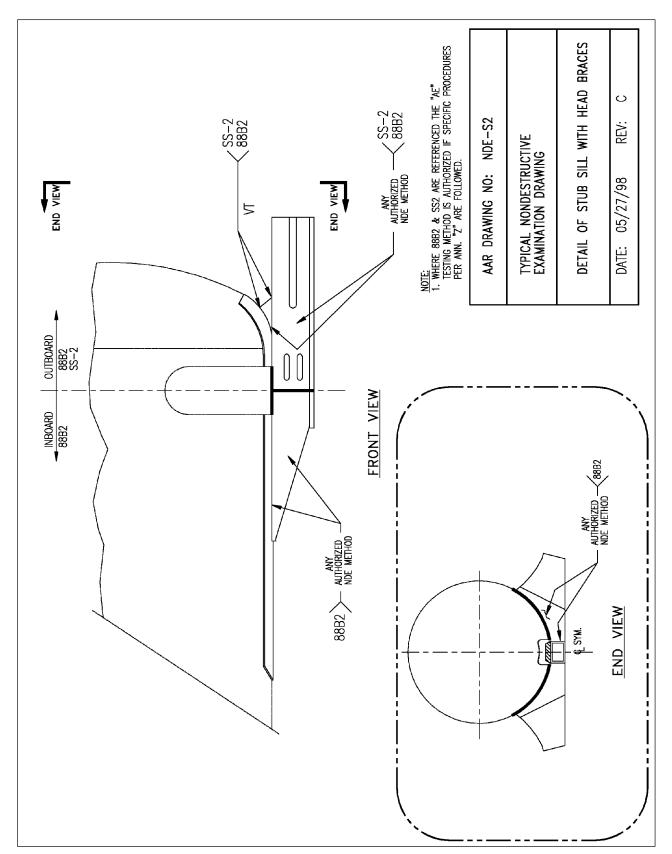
AAR Drawing No. NDE-S2 Detailing the Stub Sill with Head Braces
